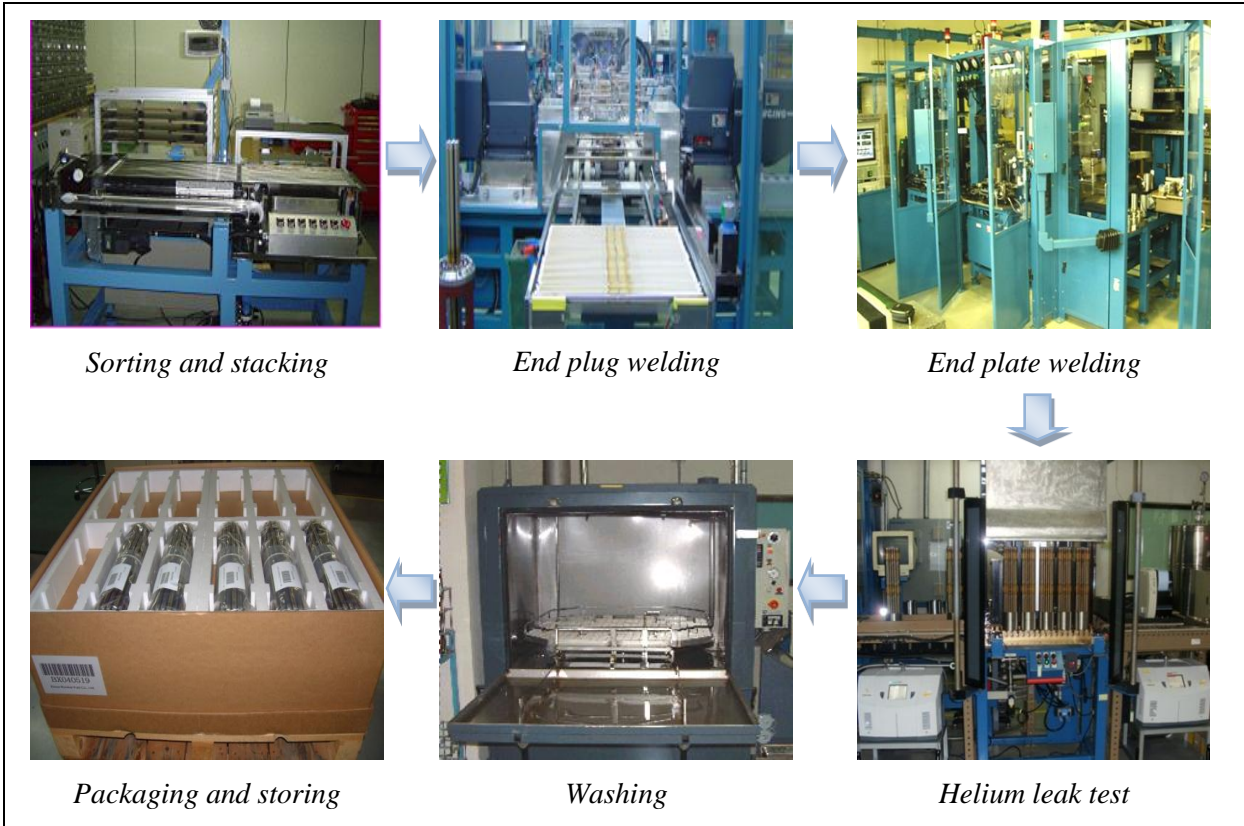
Fuel rod and fuel bundle manufacturing process.
